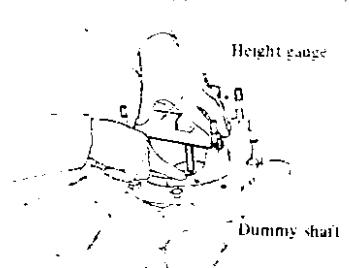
Measuring the clearance between the height gauge and dummy shaft.
